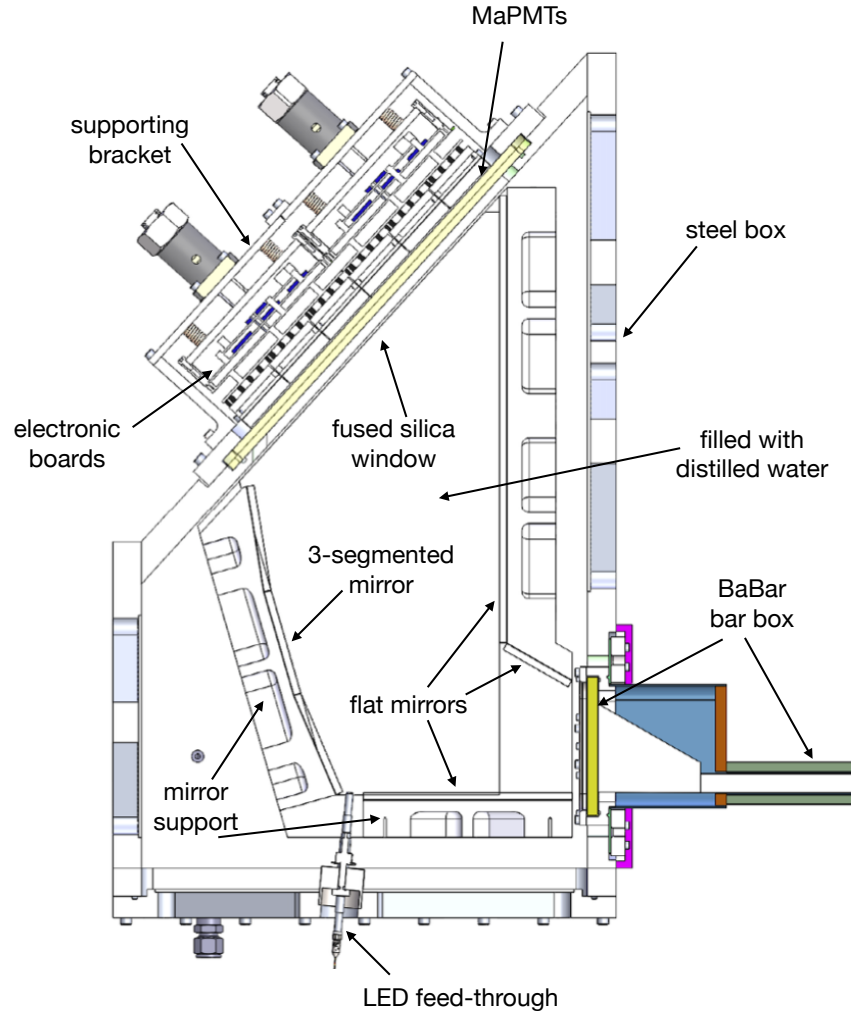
Engineering drawing of the GLUEX DIRC optical box design.
